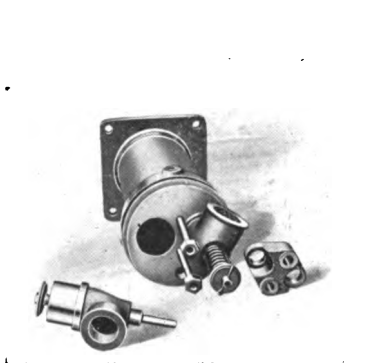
Cylinder, Valves and Cages, Manley Engine.
